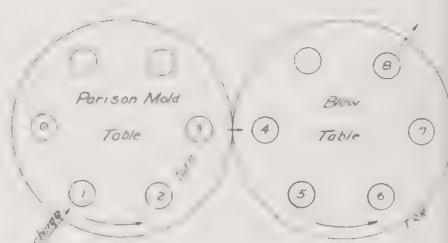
Automatic glass bottle-making machine: the two revolving tables.
